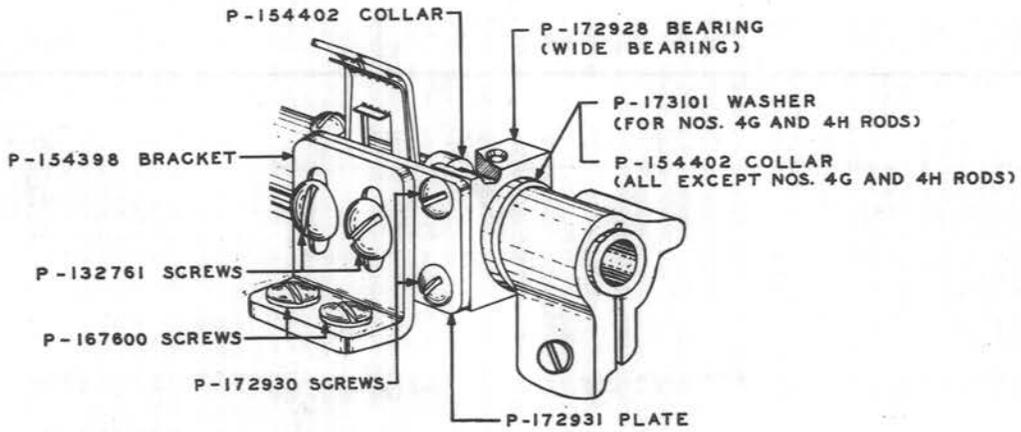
D - Bearing Parts - Rotating Lever End of Earlier-type Trip Rods
